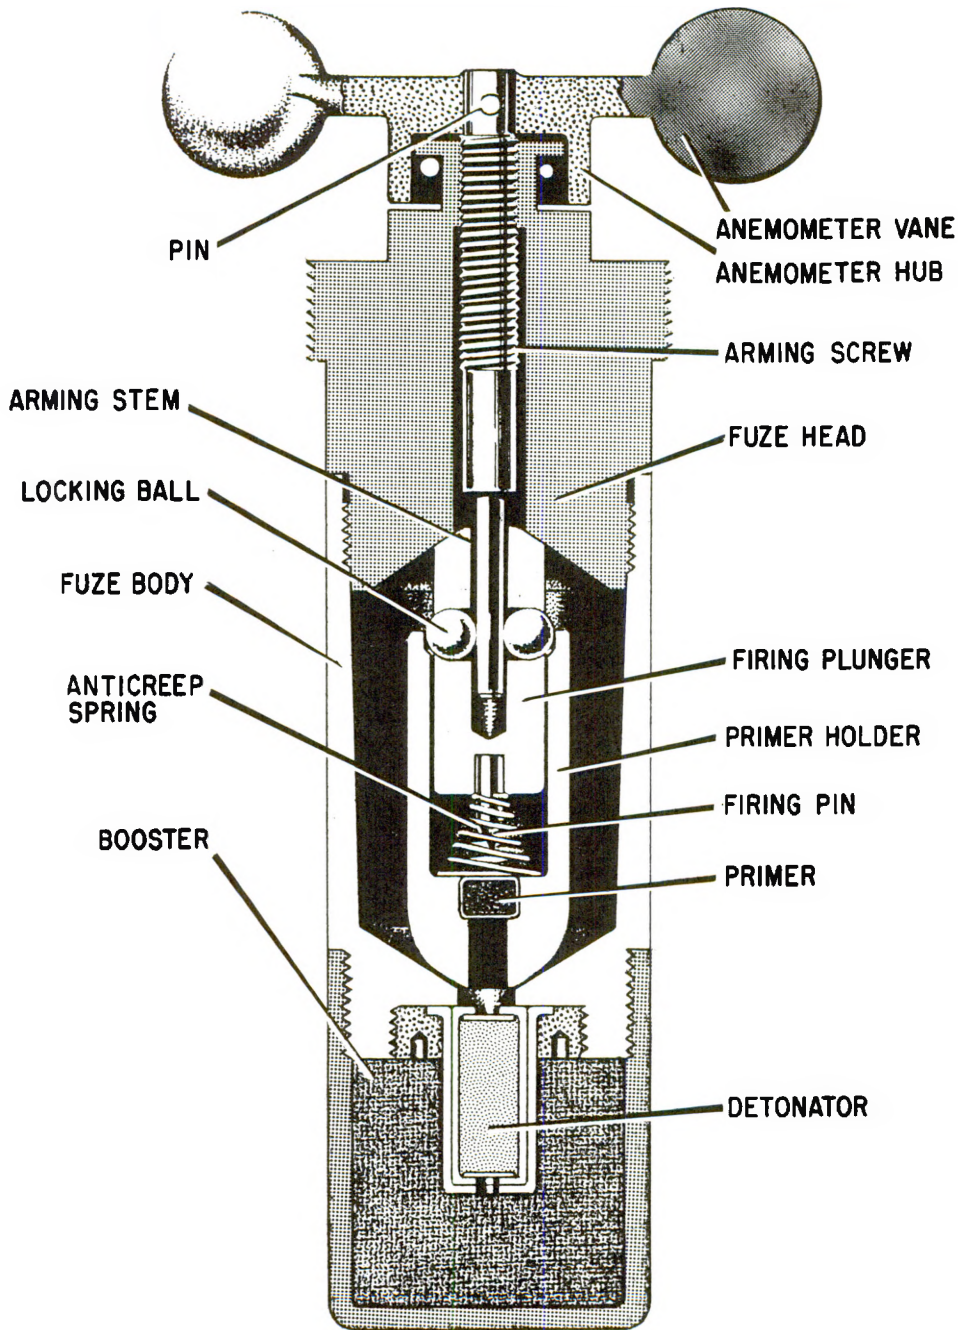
Multiposition Fuze AN-M173 cutaway view.
